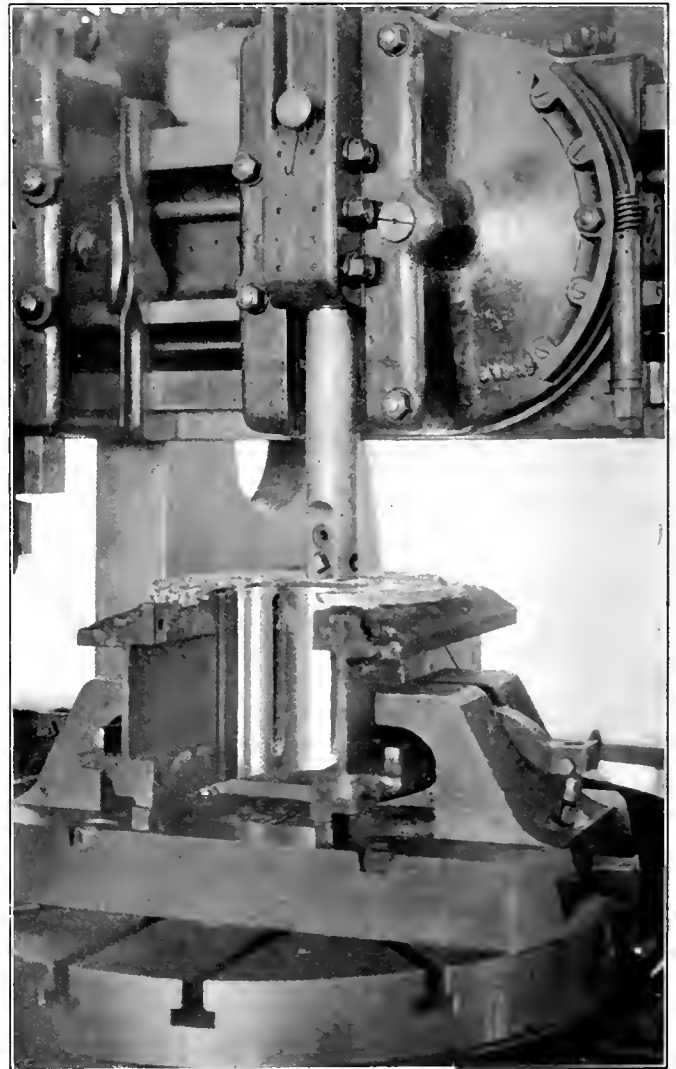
Application of Driving Box Chuck to Boring Mill.
